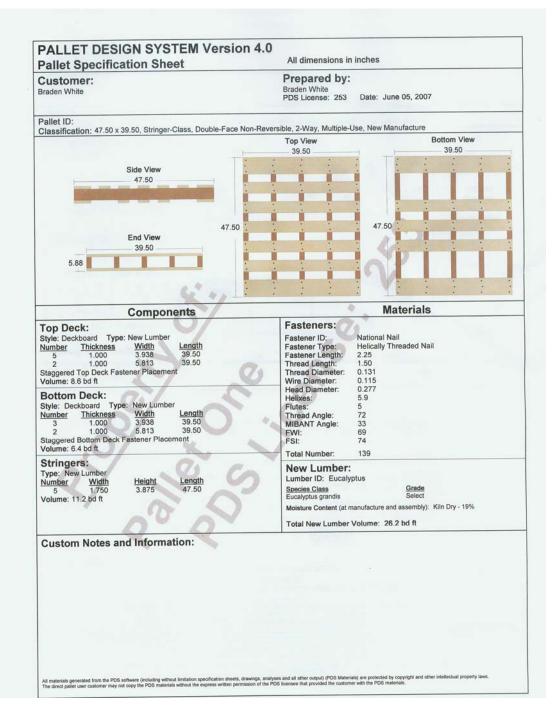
Heavy duty 5 stringer pallet design details (used with permission of PalletOne).
